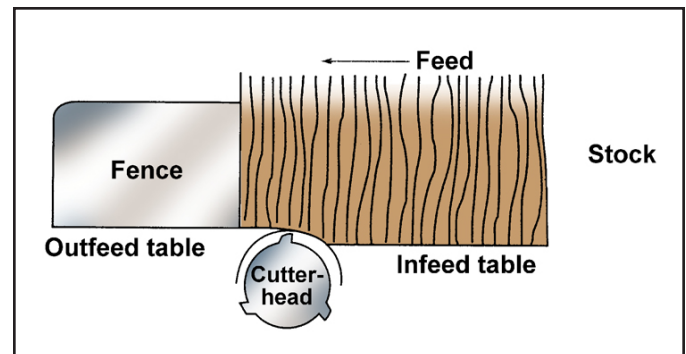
Proper Adjustment of Outfeed Table on Jointer
